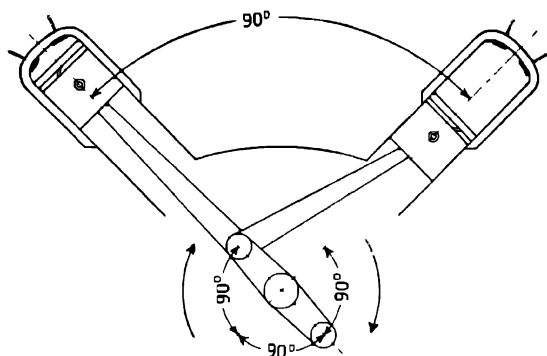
Eight-cylinder V-type Engine with Cylinder Blocks Set 90 Degrees Apart Resulting in Power Impulses Occurring Every 90 Degrees of Crankshaft Travel.
